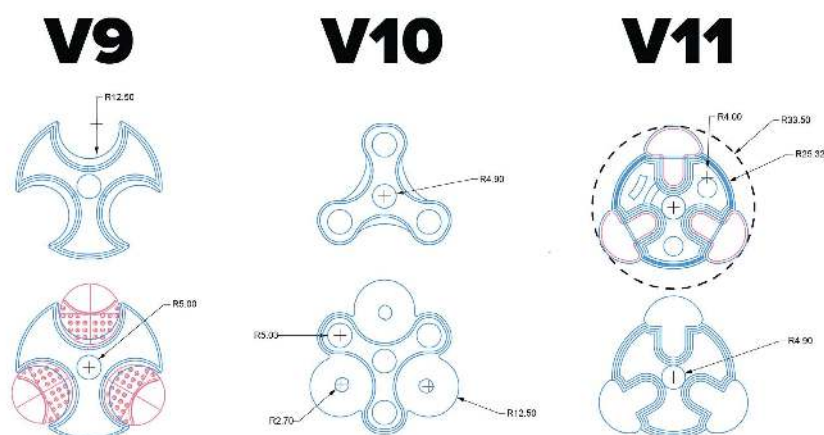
Prototype versions V9, V10 and V11 technical drawings. All given dimensions are in mm.
